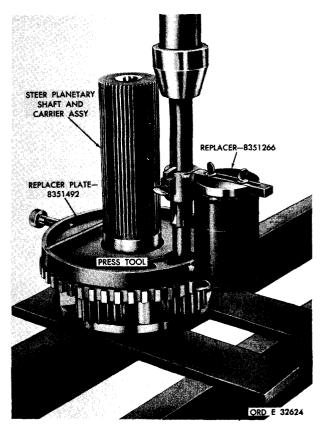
Removing steer planetary carrier and shaft assembly spindle
